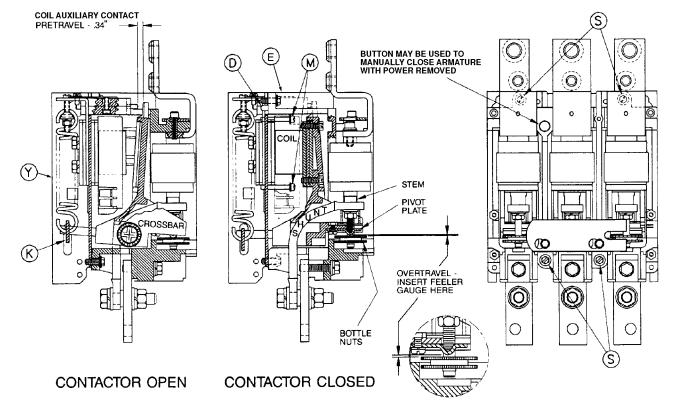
Size 6 Vacuum Contactor, Class 8502 Type WHO
